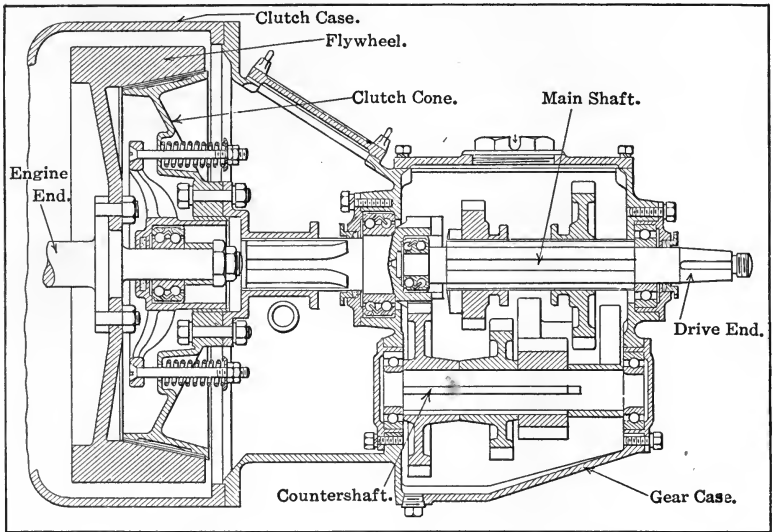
Clutch and Gearset Portion of Unit Power Plant Showing Positive Alignment Between Clutch and Gearset Main Shaft.
